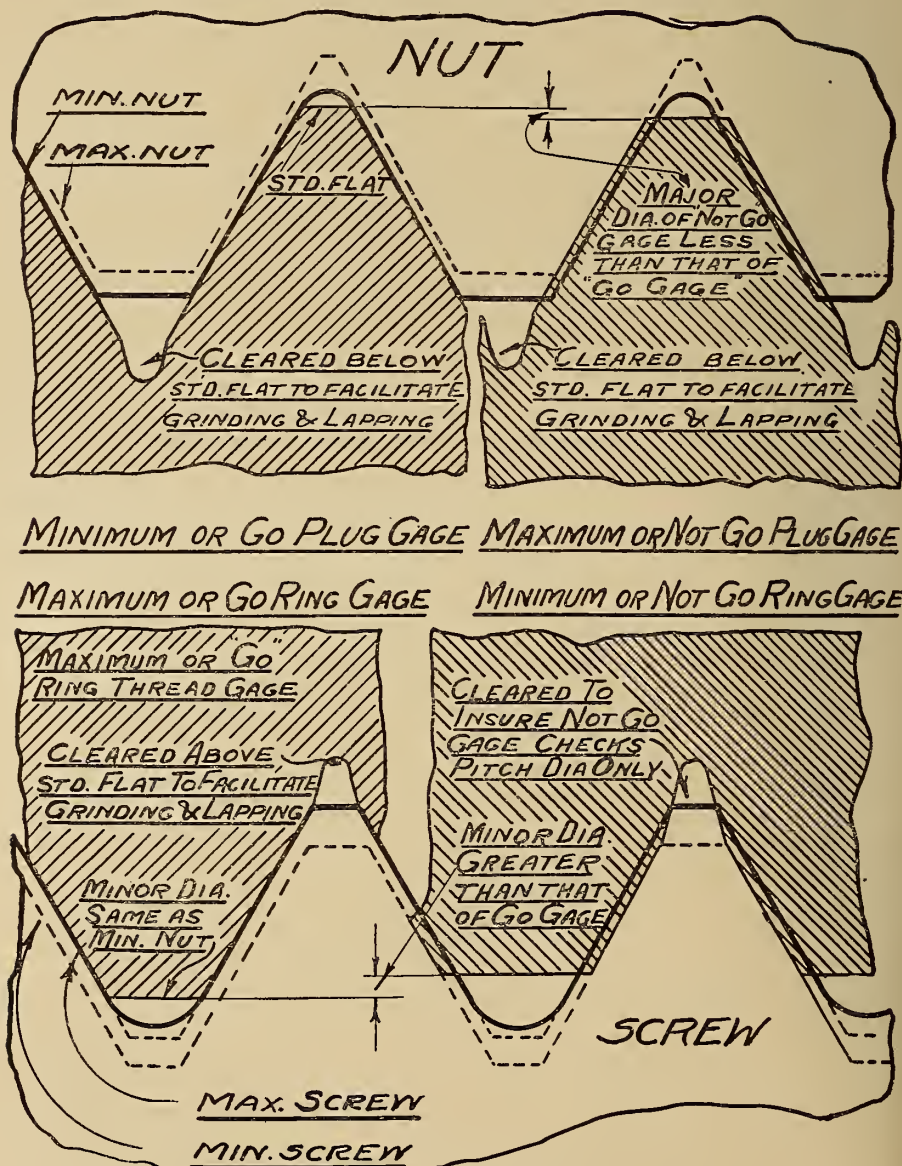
Illustration of “go” and “not go” plug and ring gages
